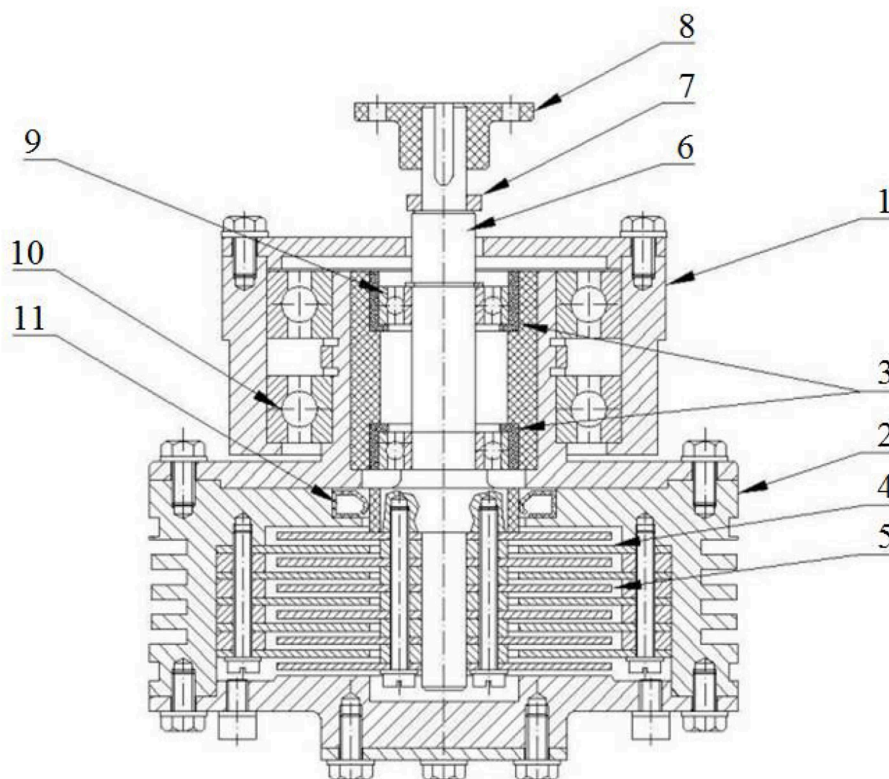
| Design solution of a prototype of the clutch: 1, bearings casing; 2, clutch casing; 3, insulating sleeves for shaft bearings; 4, discs fixed to the casing; 5, discs placed on the shaft; 6, shaft; 7, sliding ring; 8, flexible coupling; 9, shaft's bearing; 10, clutch's bearing; 11, sealing ring.
